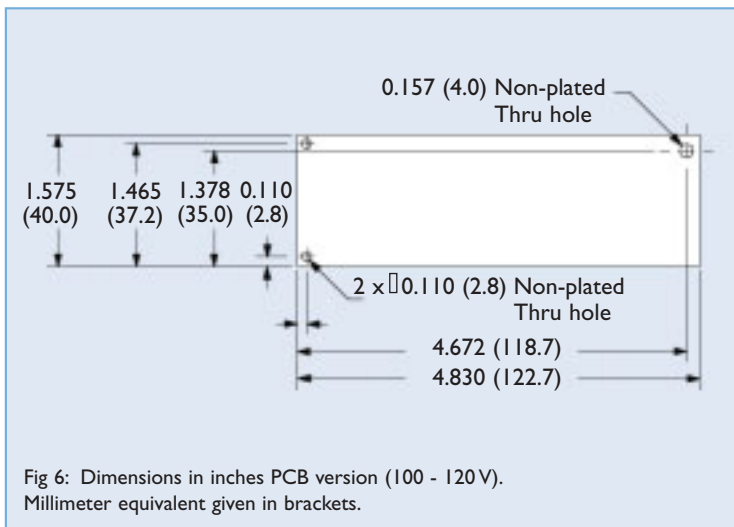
Dimensions in inches PCB version (100 - 120 V).
